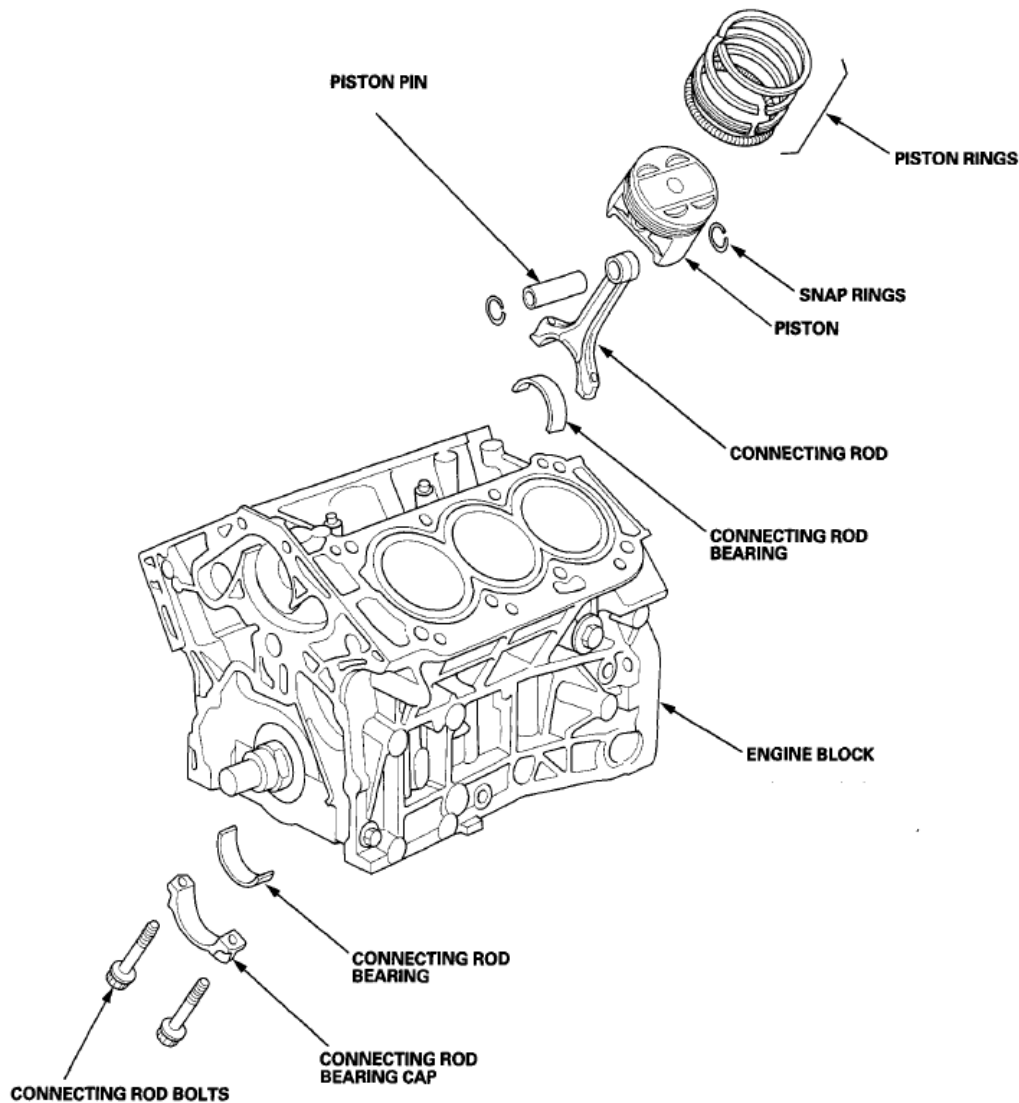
Exploded View Of Engine Block Components (3 Of 3)
